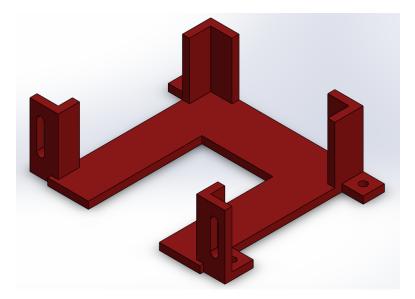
Pamphlet holder used to hold the stack of pamphlets above the spinning wheel
